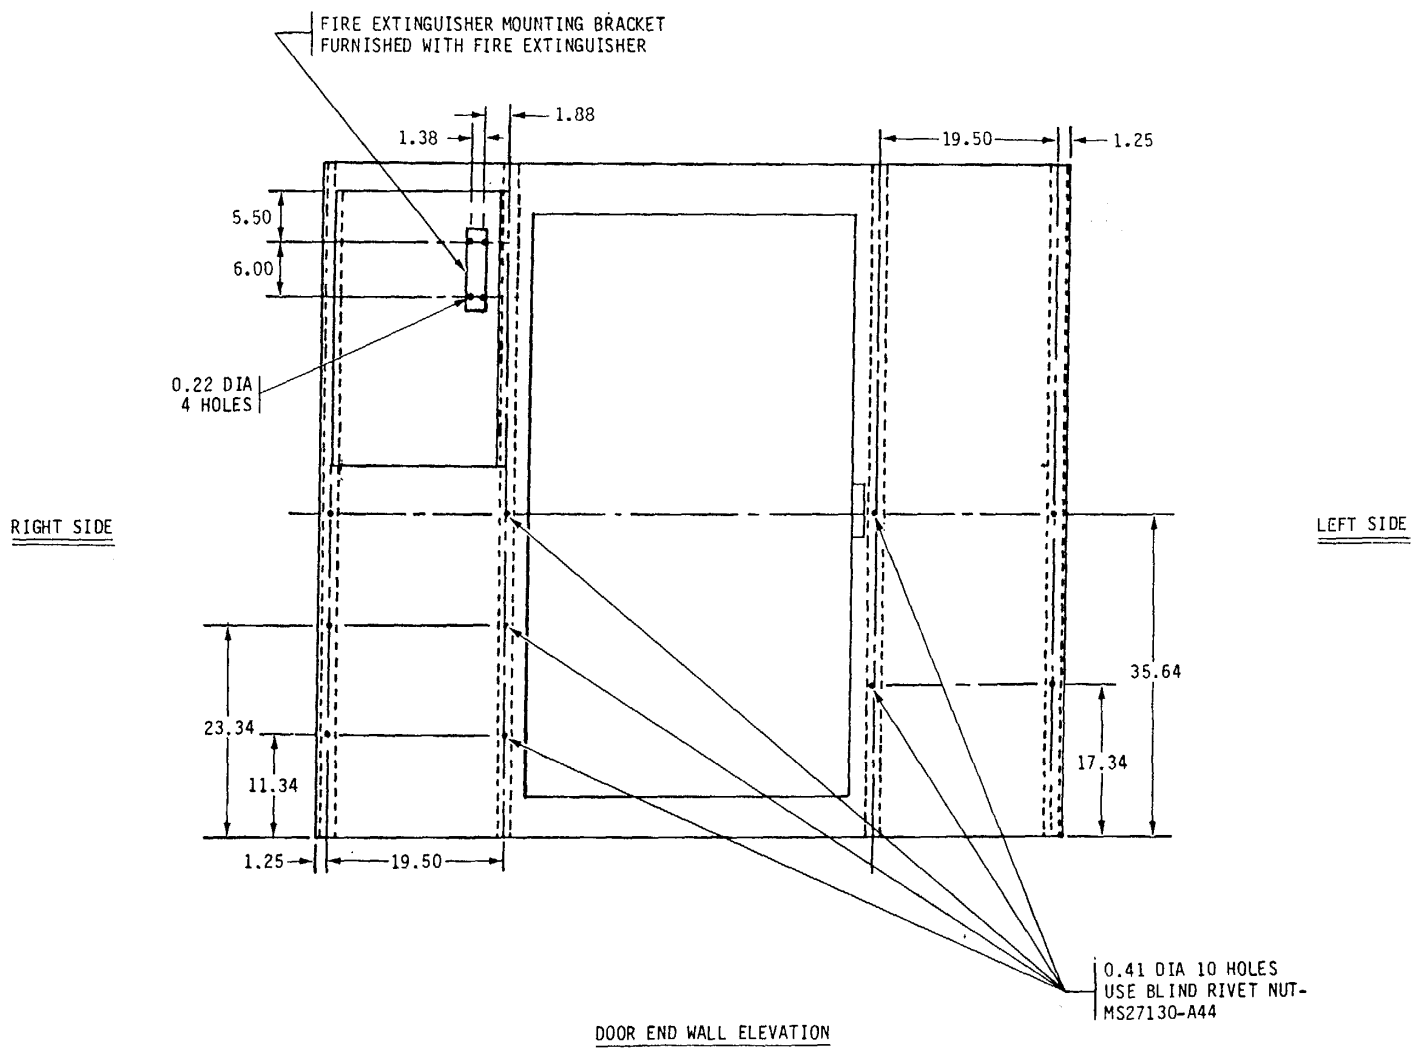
Blind rivet nut installation in door end wall, unit 1, 280.
